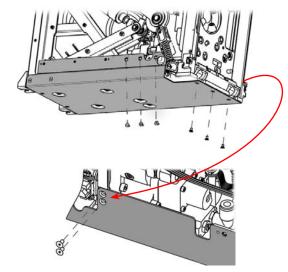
Screws Securing Bottom Cover to Fluidics Module
